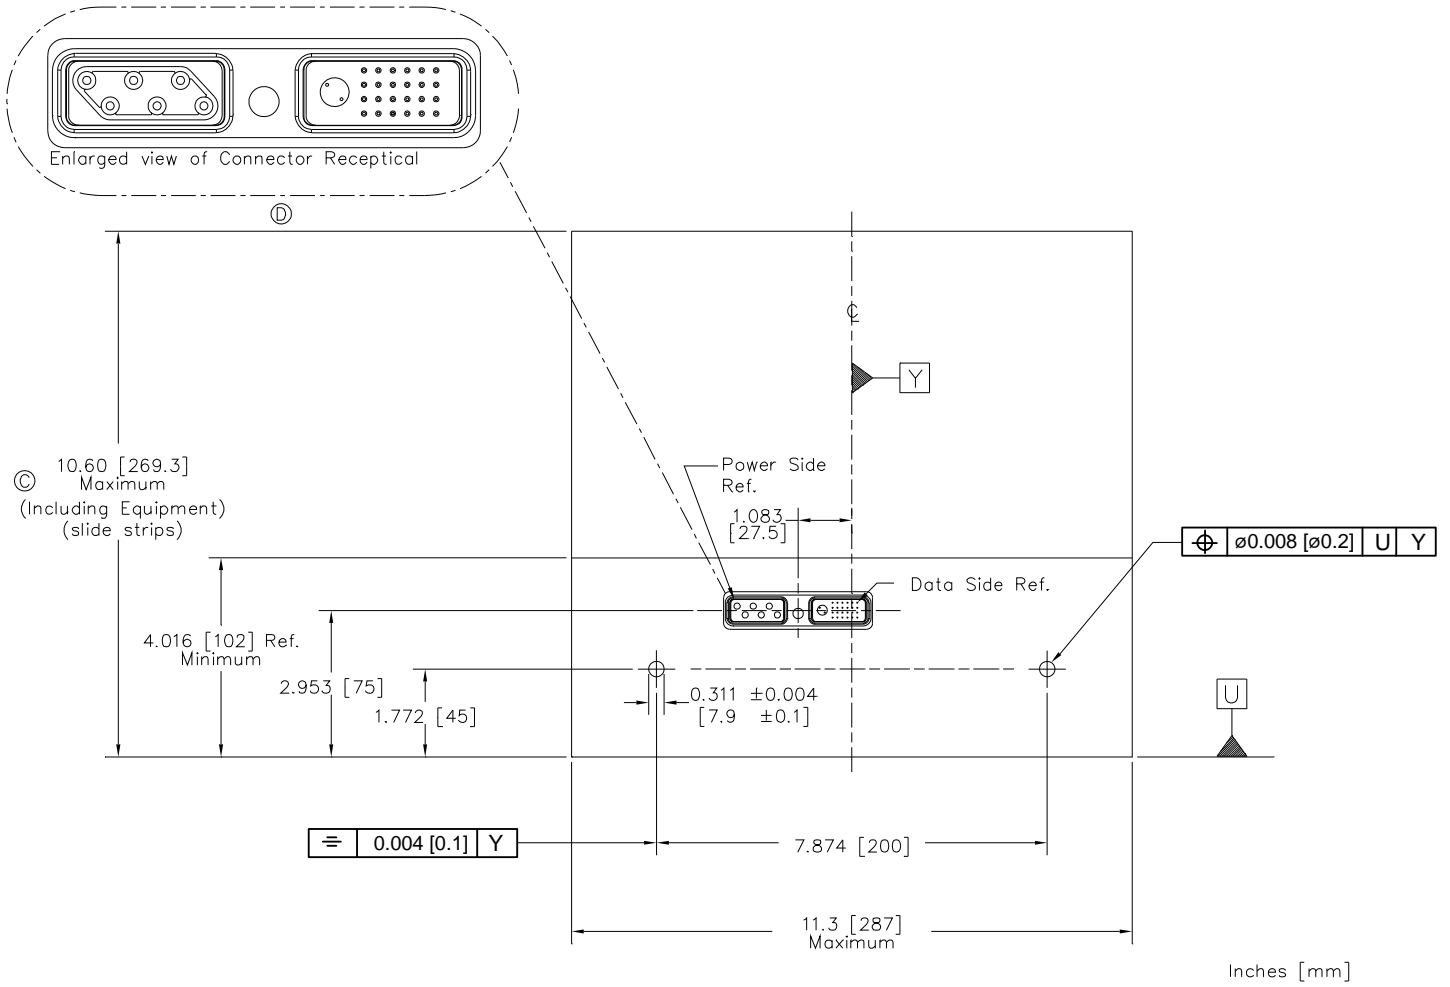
A – GAIN Size 4 Equipment Standard Dimensions Drawing – Rear View
